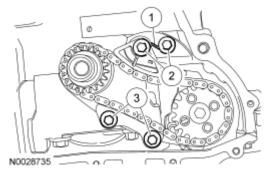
Locating Tensioner Shoulder Bolts, Tensioner Spring And Guide Courtesy of FORD MOTOR CO.
